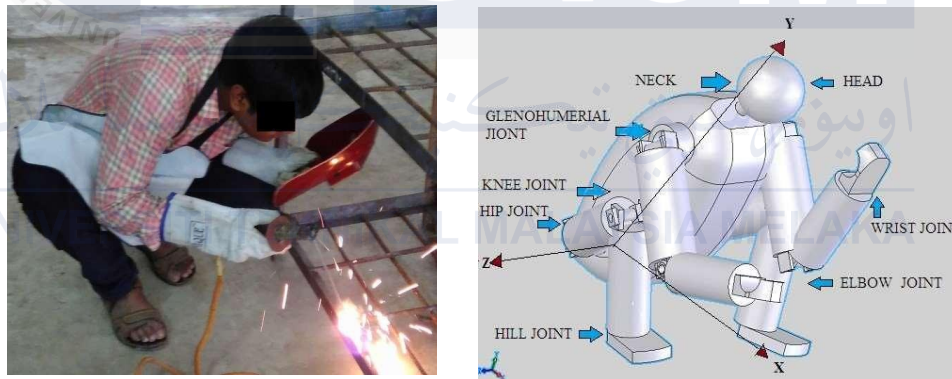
Working Posture of Welder and CAD model of welder’s joint (Suman et al, 2018)
